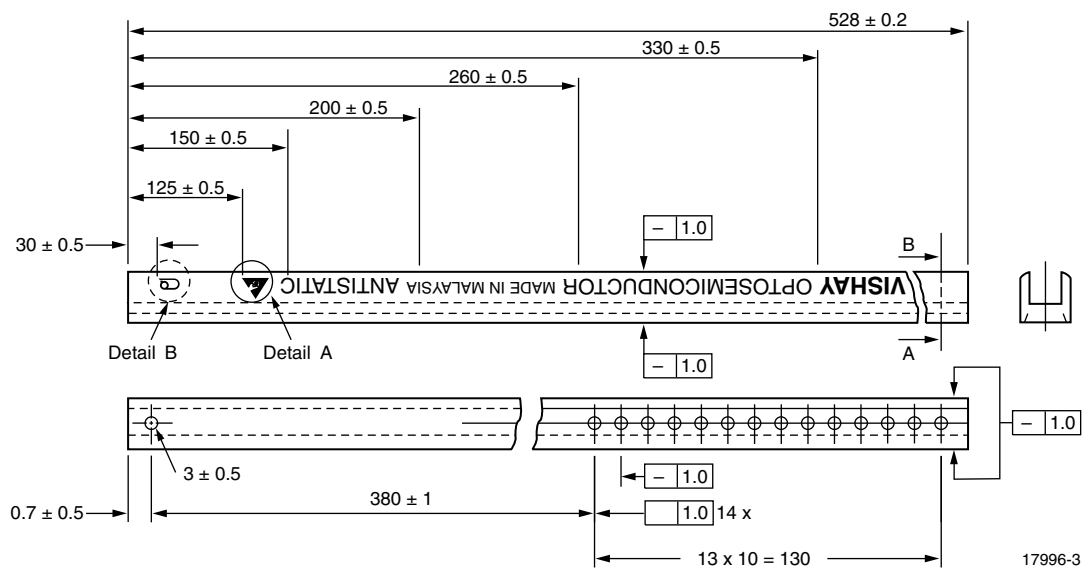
Shipping Tube Specifications for DIP-6 Packages
